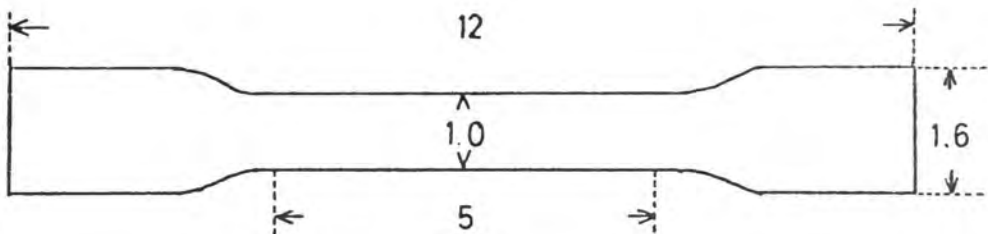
Dimensions of test pieces used in strain-anneal technique (figures in cm).
